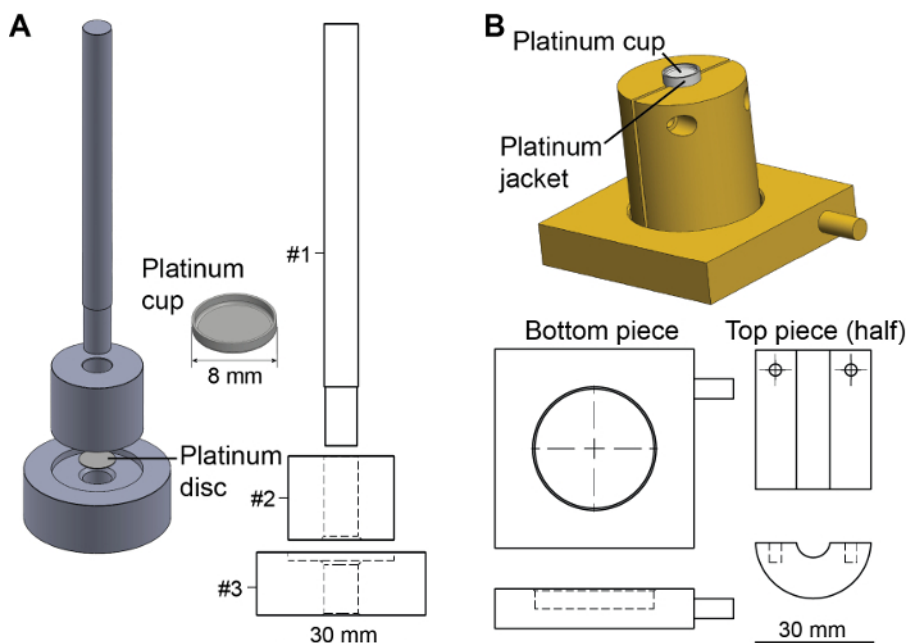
Tools required to produce the platinum jacket. A) 3D view (left) and scaled drawings (right) of the tool needed to produce the platinum cups. By pushing on the 10-mm-diameter platinum disc, its outer part is bent up over 1 mm thickness into a cup-shape, so that it can fit into and be welded together with the 8-mm-diameter platinum jacket. B) 3D view (top) and scaled drawings (bottom) of the tool needed to weld a platinum cup to the platinum jacket (only half of the top piece is shown). [Please click here to view a larger version of this figure.](#)
